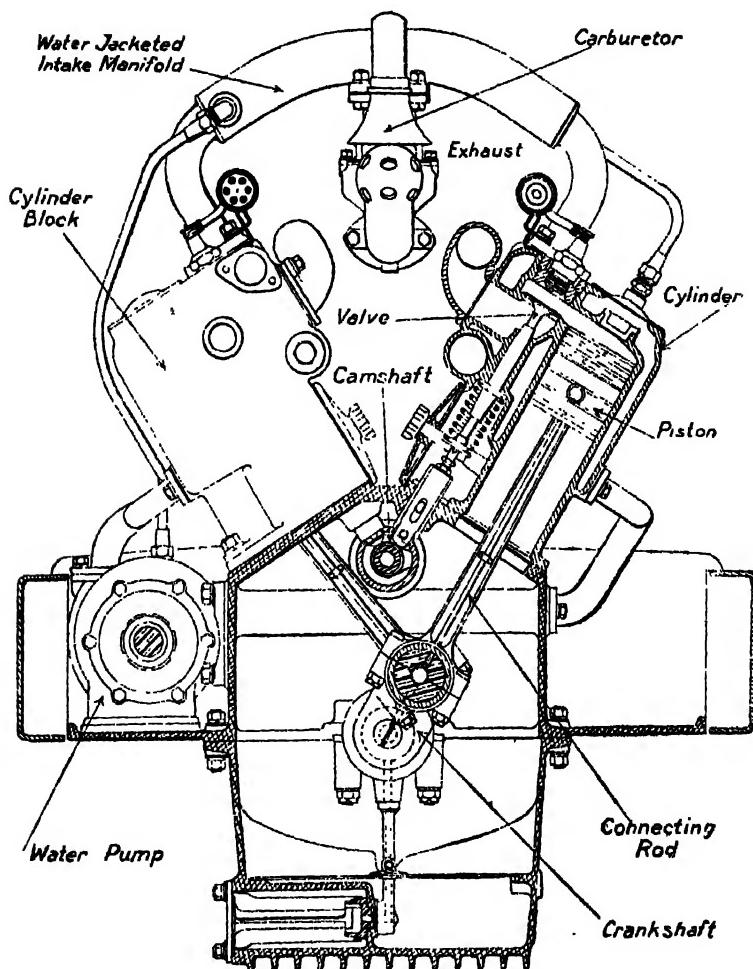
End Sectional View of Packard "Twin Six" Motor, Showing Arrangement of Cylinders.
